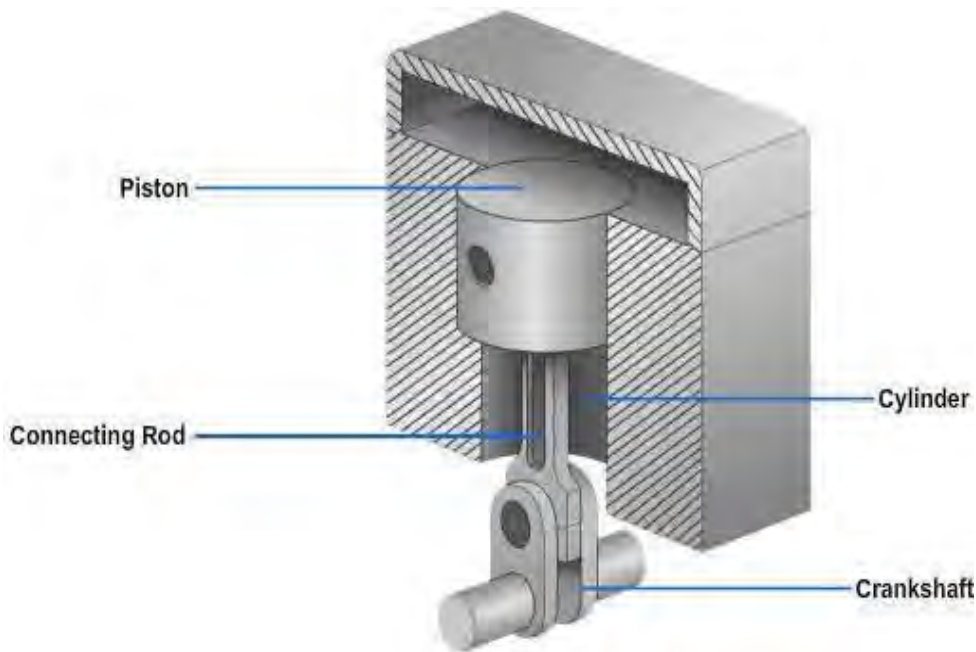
Cylinder, piston, connecting rod, and crankshaft for a one-cylinder engine.
